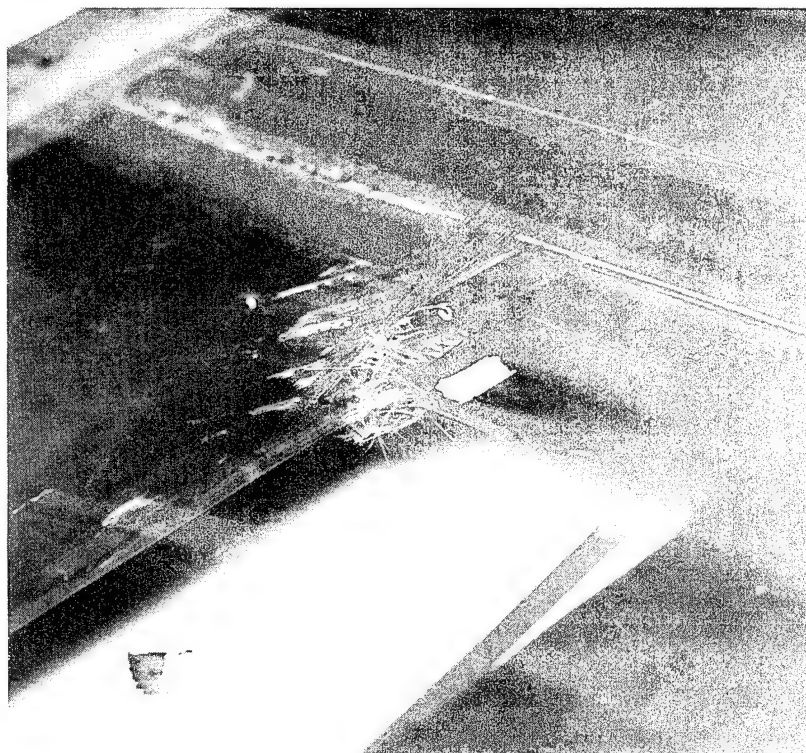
Posttest Photograph of Shear Cutout Panel (-505)
